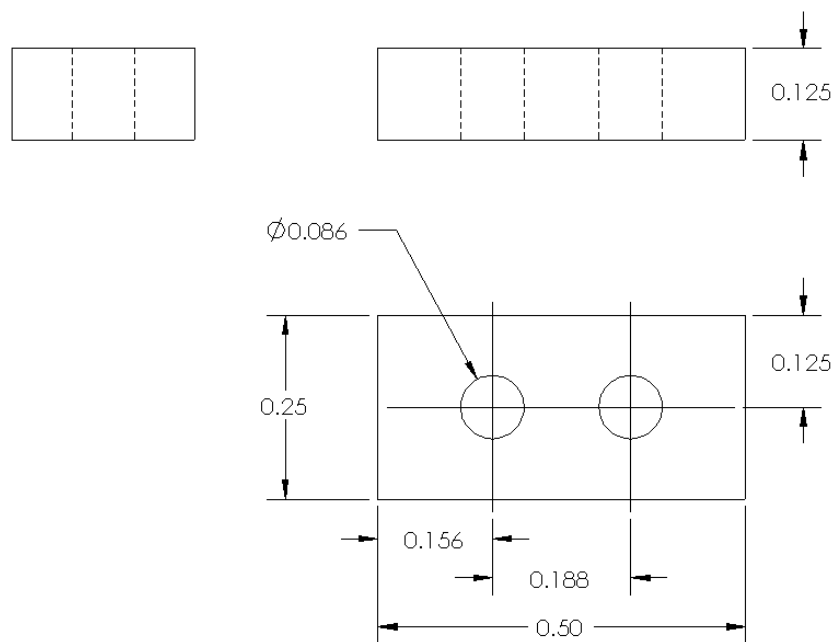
Dimensions of the sensing element mounting plate of the shear strain extensometer. All dimensions are in inches.
